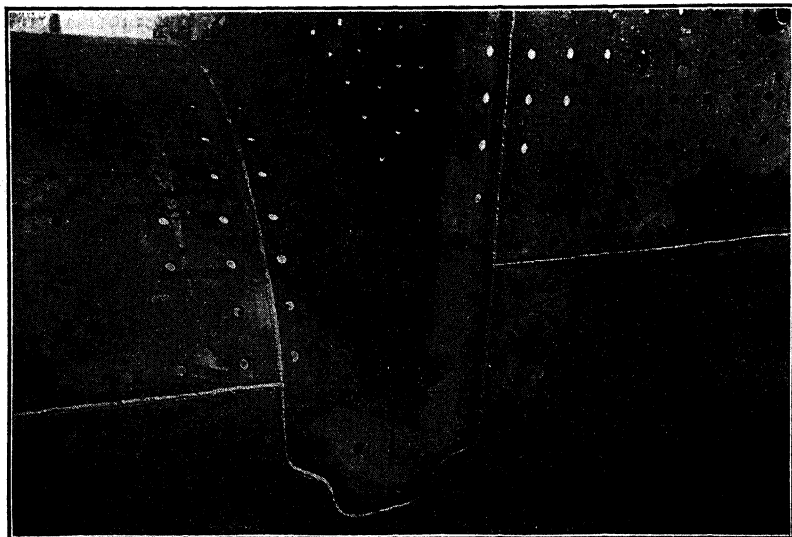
Locomotive firebox completely welded by shielded arc process.
